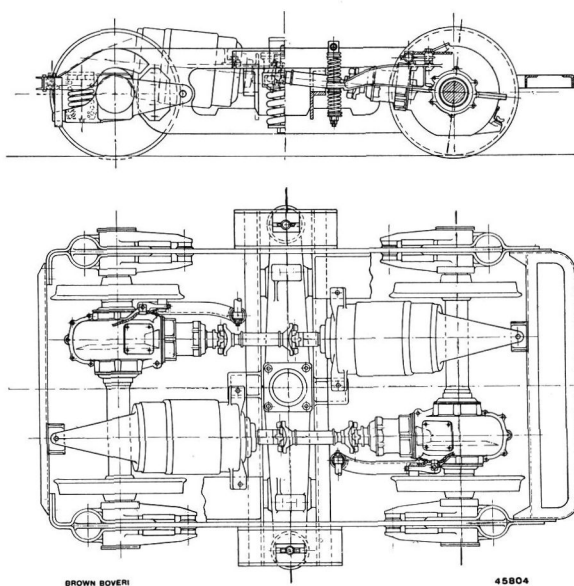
Bogie with driving motors rigidly mounted in longitudinal axis, with cardan drive.
